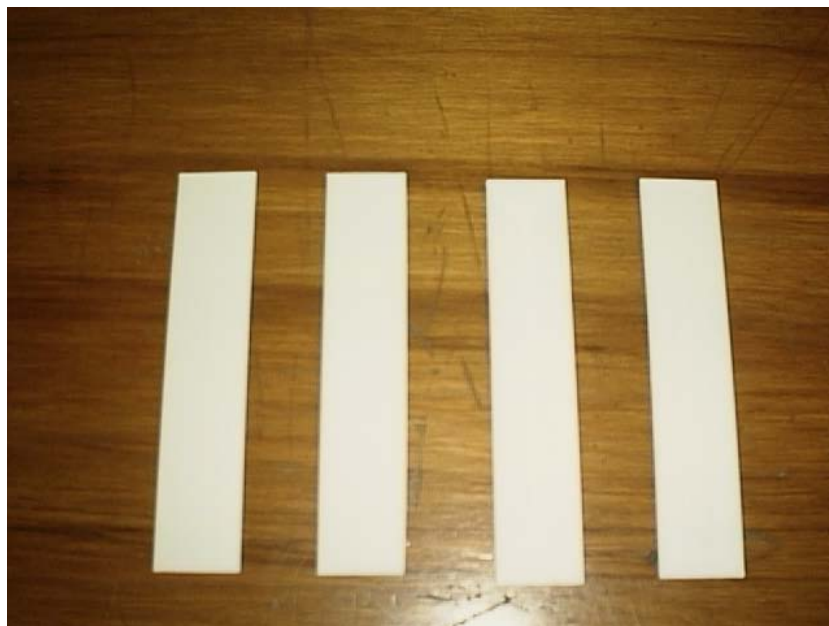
A photograph of the Hounsfield tensile testing machine.Figure 3-12 The tensile specimens of ABS formed using the rapid prototyping service.
